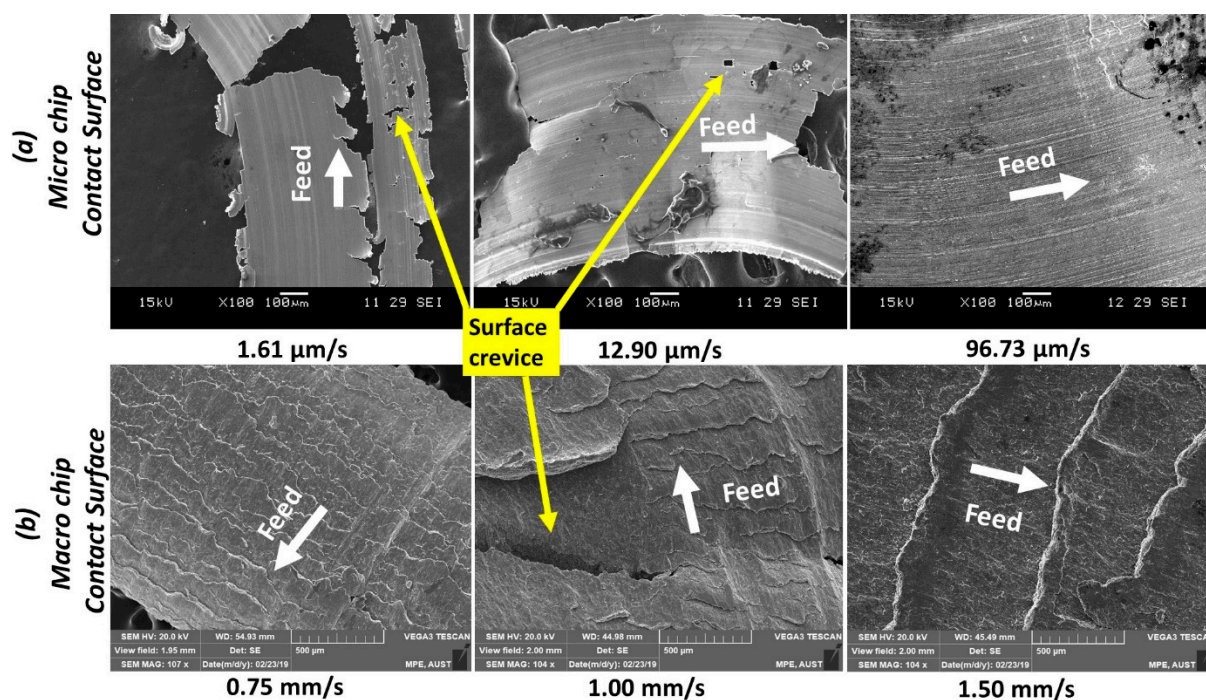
Morphology of contact surface of Al alloy chip produced in (a) micro machining (b) macro machining.
